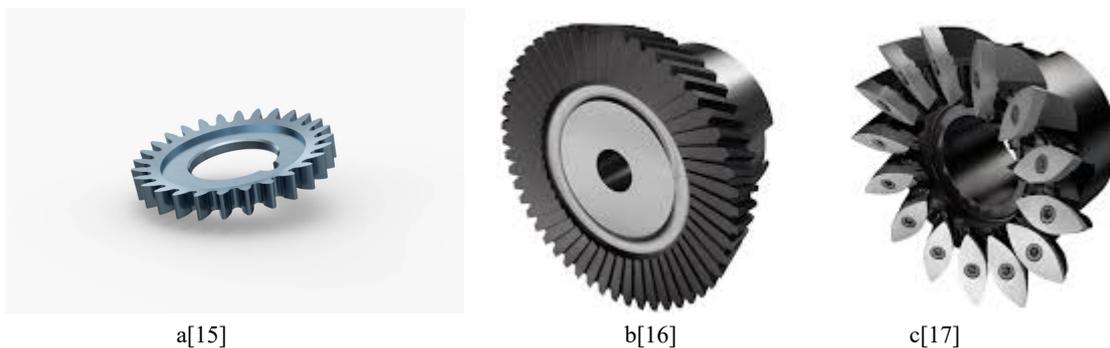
Solid spur cutters with positive rake for helical gears (a), universal helical cutter with oblique face (b) and cutter with inserts (c)
